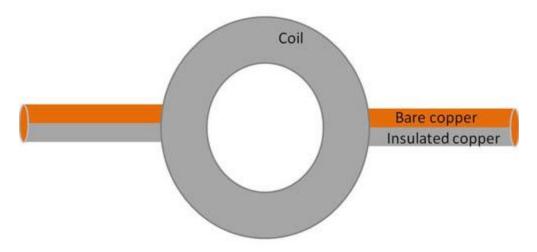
This drawing shows the parts of the axles to strip of insulating material.
